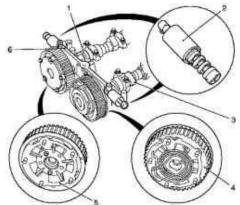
Scheme adjust camshaft engine Z 18 XER DOHC-I: 1 - camshaft drive intake valves, 2 - valve camshaft adjustment, 3 - camshaft drive of the exhaust valves, 4 - control camshaft drive exhaust valves, 5 - control camshaft drive intake valves, 6 -- camshaft bearings
